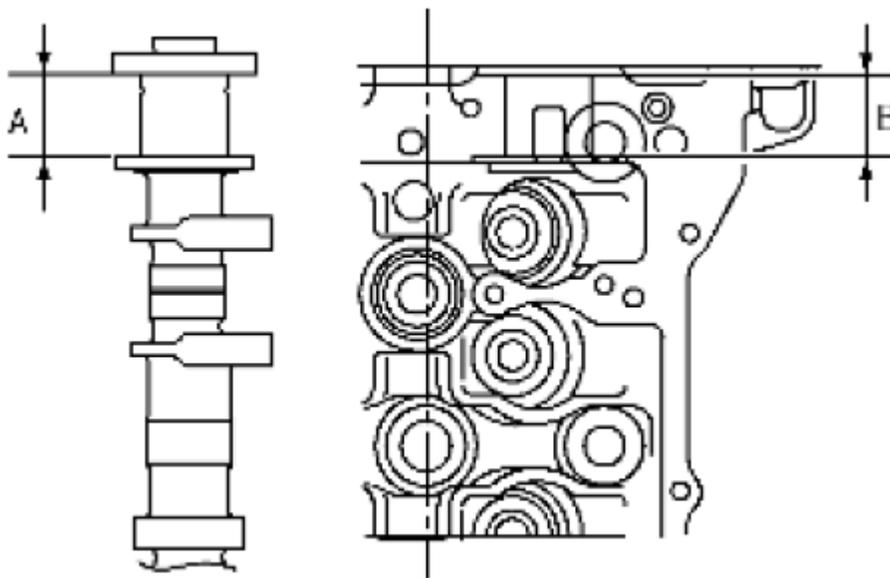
Identifying Camshaft No. 1 Journal And Cylinder Head No. 1 Journal Bearing Dimension
